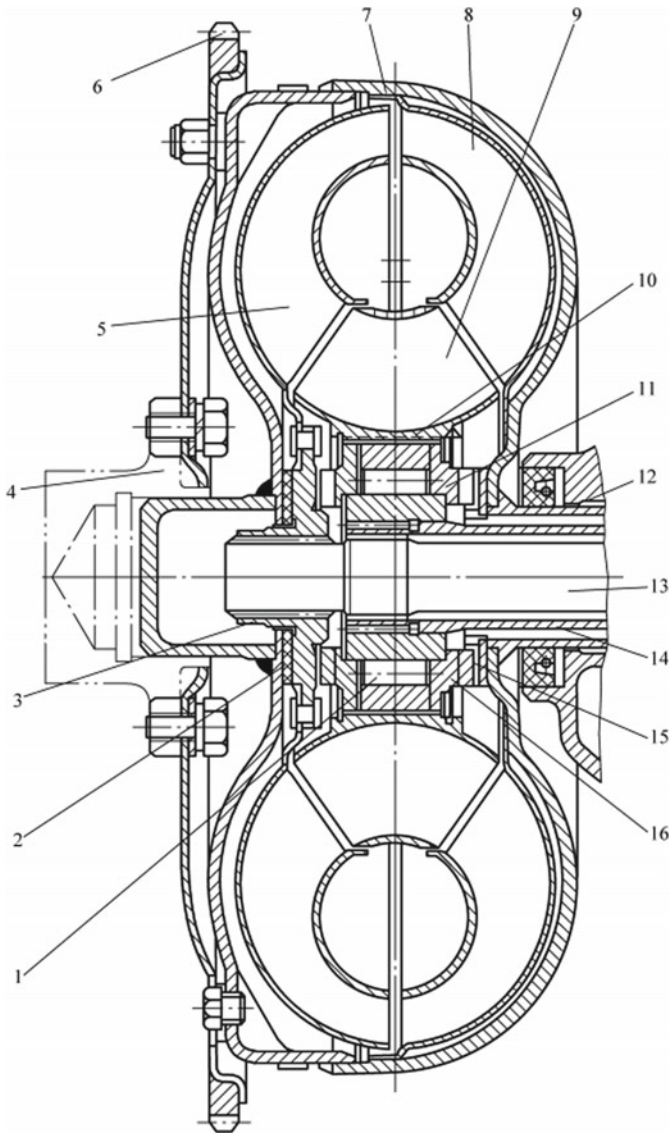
Structure of three-element integrated hydraulic torque converter. 1—Roller, 2—pourable resin chock, 3—turbine hub, 4—flange, 5—turbine, 6—starting gear ring, 7—torque converter housing, 8—impeller, 9—guide wheel, 10—OWC outer race, 11—OWC inner race, 12—Impeller hub, 13—torque converter output shaft, 14—guide wheel fixing casing, 15—thrust washer, 16—OWC cover
